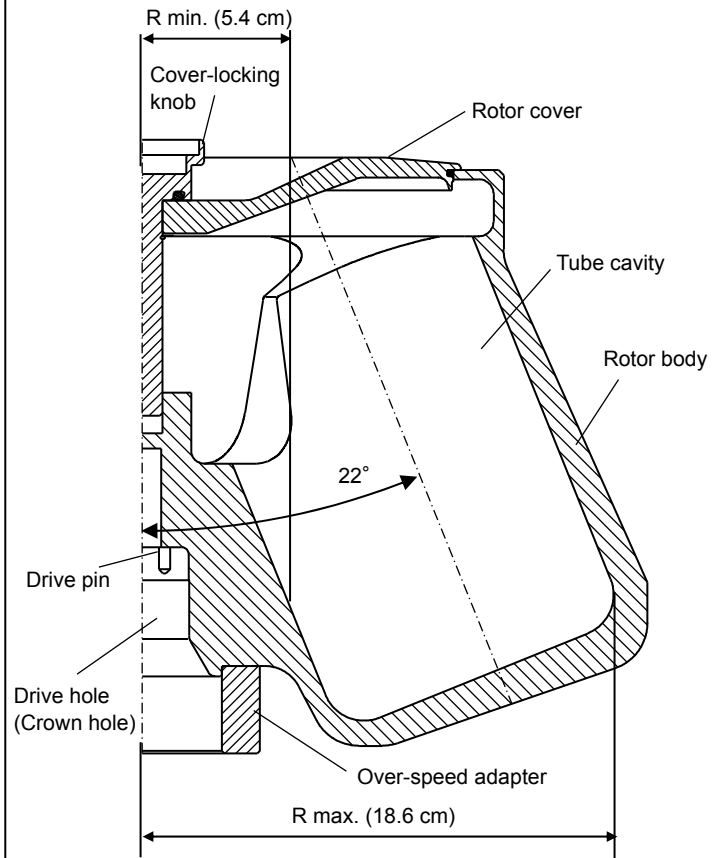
Cross-Sectional View of the R9A2 Rotor
